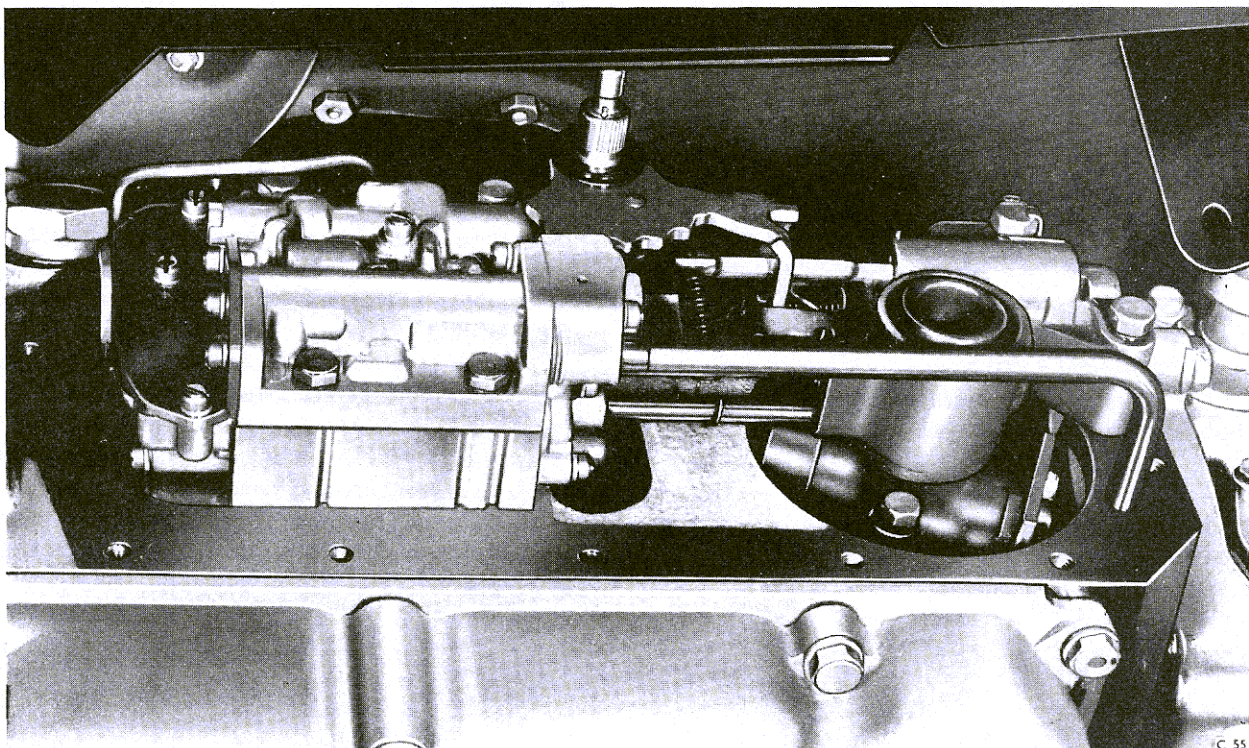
Side cover removed and selector lever moved to Reverse position prior to removal of control valve unit
